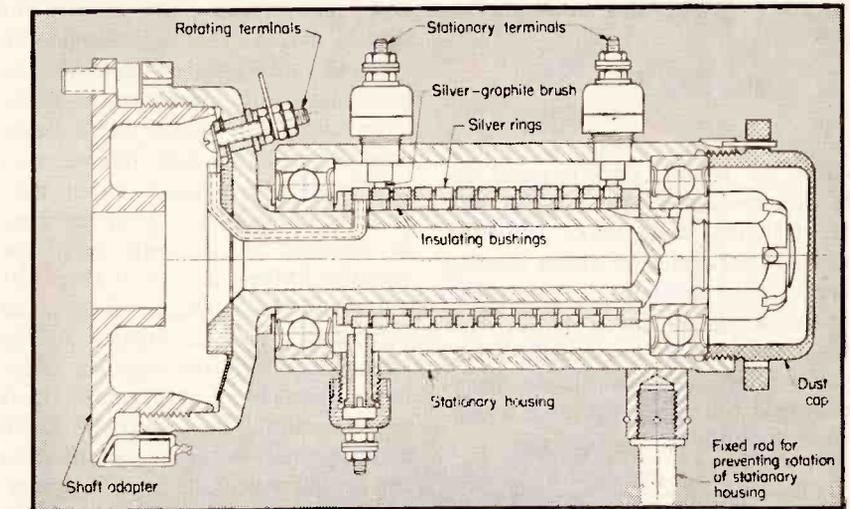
Drawing of connector unit employed whenever the end of the shaft under test is accessible, an adaptation of a design furnished by the Hamilton-Standard Propeller Company. The unit is pictured in Fig. 11
